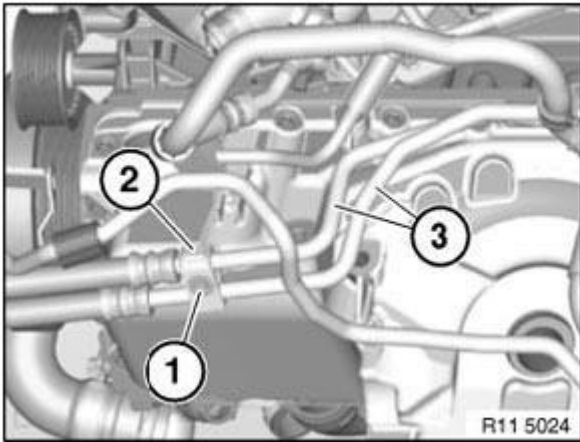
Identifying Screw, Holder And Transmission Oil Cooler Lines
